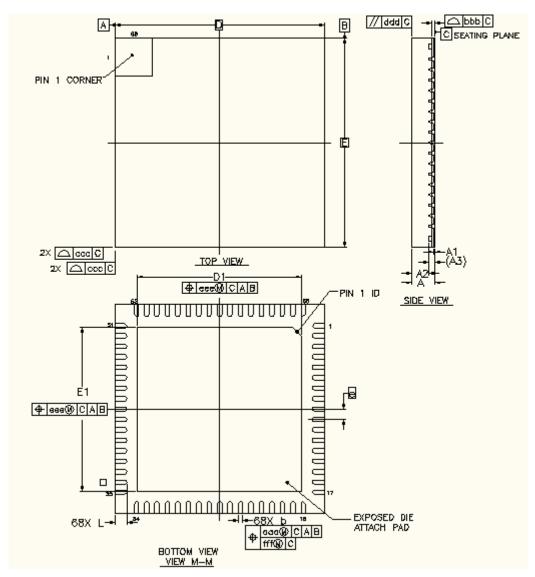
RK808-X QFN68 7mm X 7mm Package Top View
